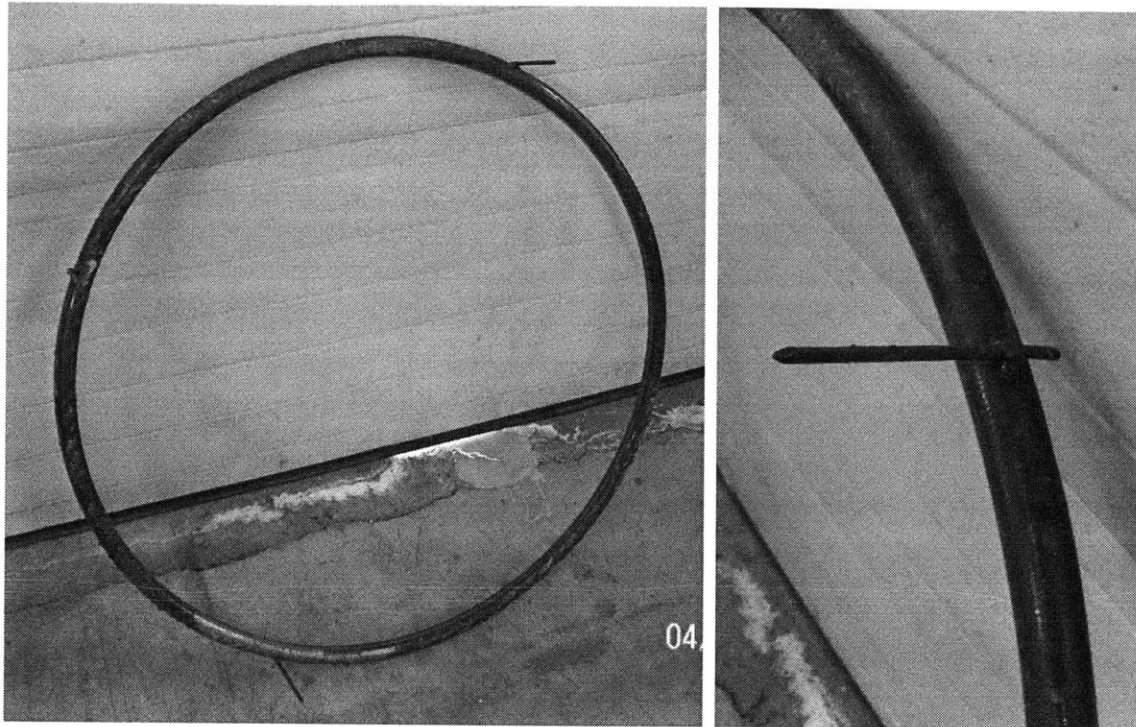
Steel ring with welded studs used to create the epoxy channels.
